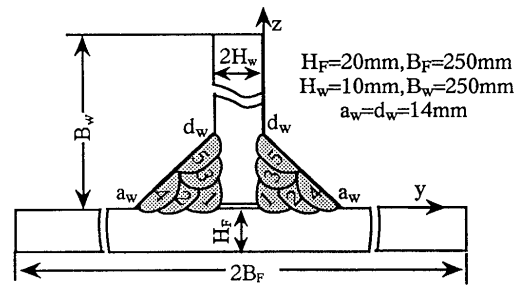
A multipass T-type fillet weld to be analyzed
